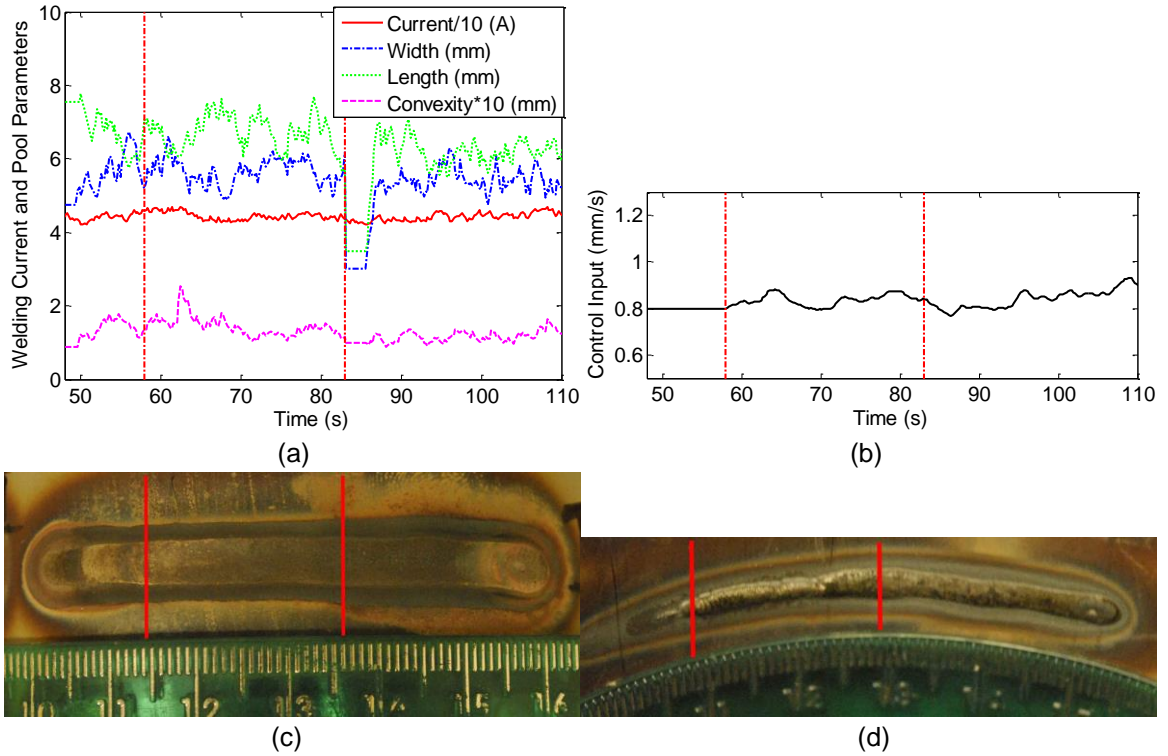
Experiment 3 results (a) Welding current and weld pool parameters (b) Control input (c) Front-side bead (d) Back-side bead.
